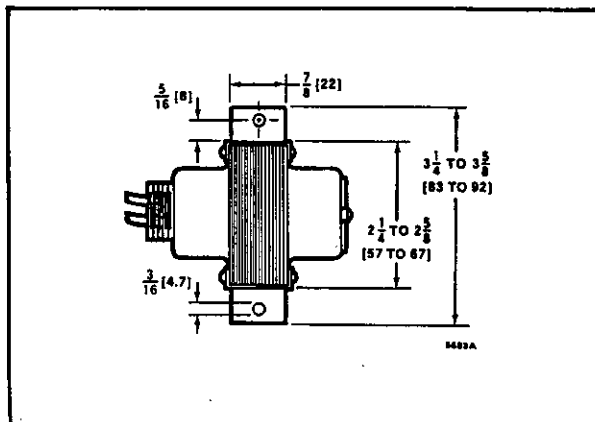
AT72D DIMENSIONS IN in. [mm IN BRACKETS] WITH CONDUIT SPUD ON PRIMARY.
